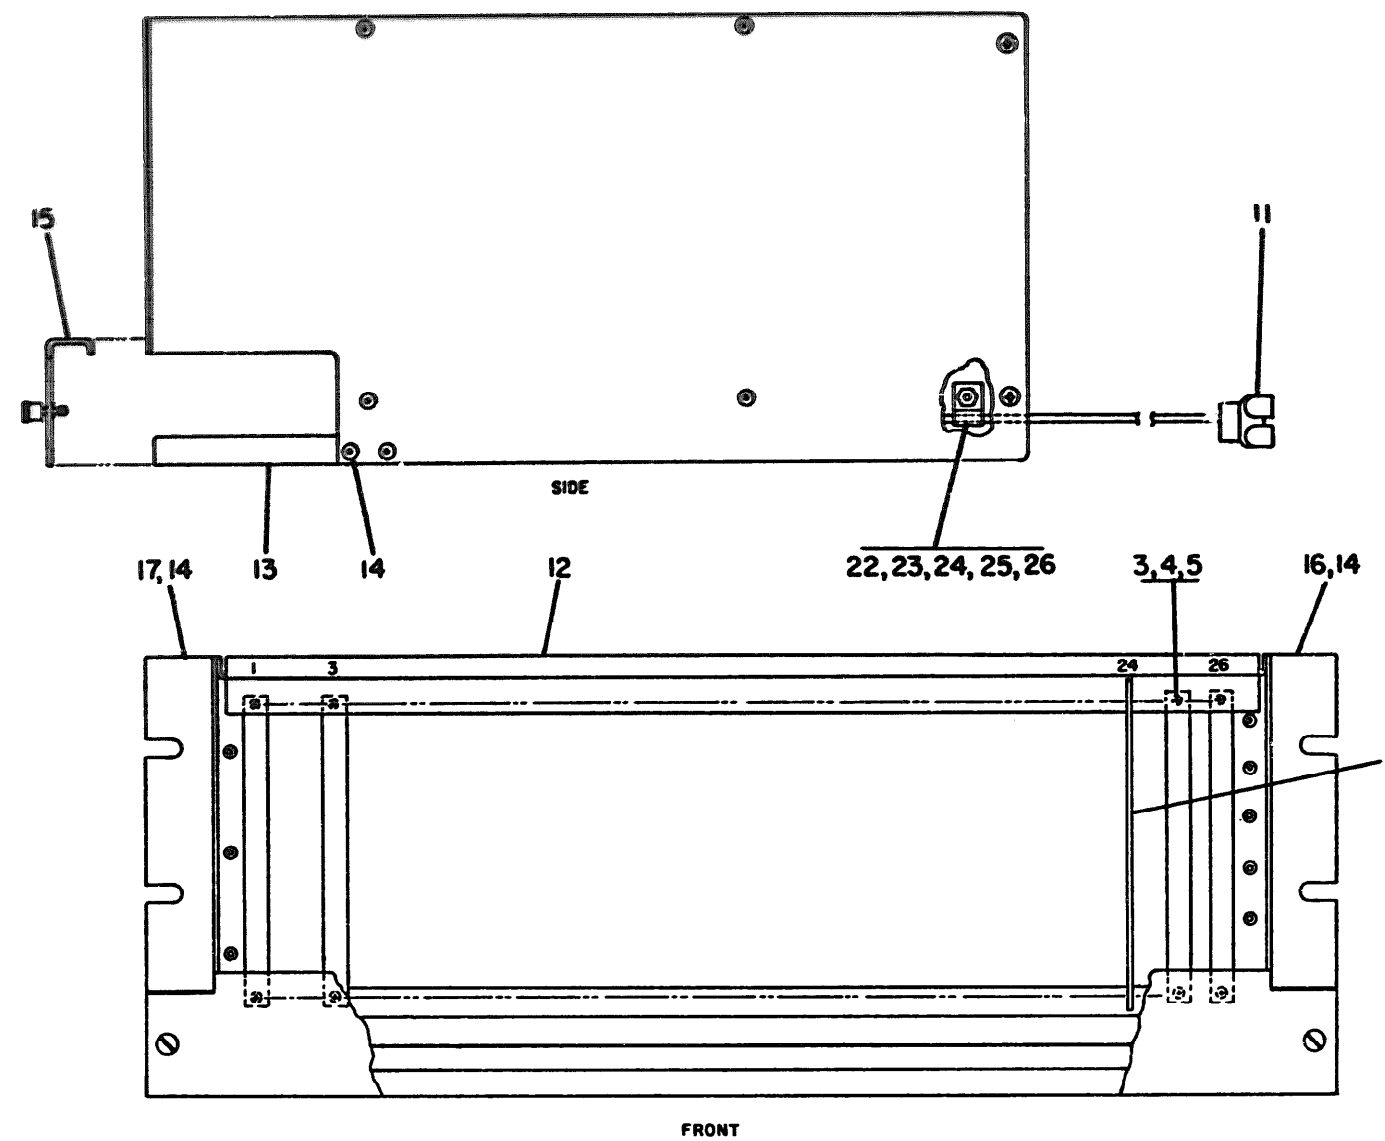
Card File Assembly Digital (Sheet 1 of 2)
